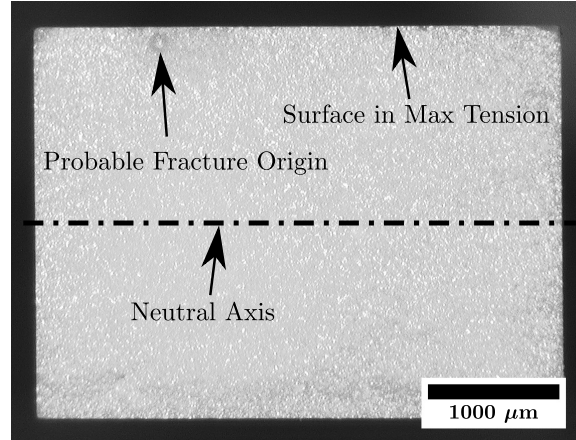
Fracture surface of an example flexural specimen tested at 1200 °C with a subsurface fracture origin. The top edge of the cross section in this photo was in the surface under tension during the test.
